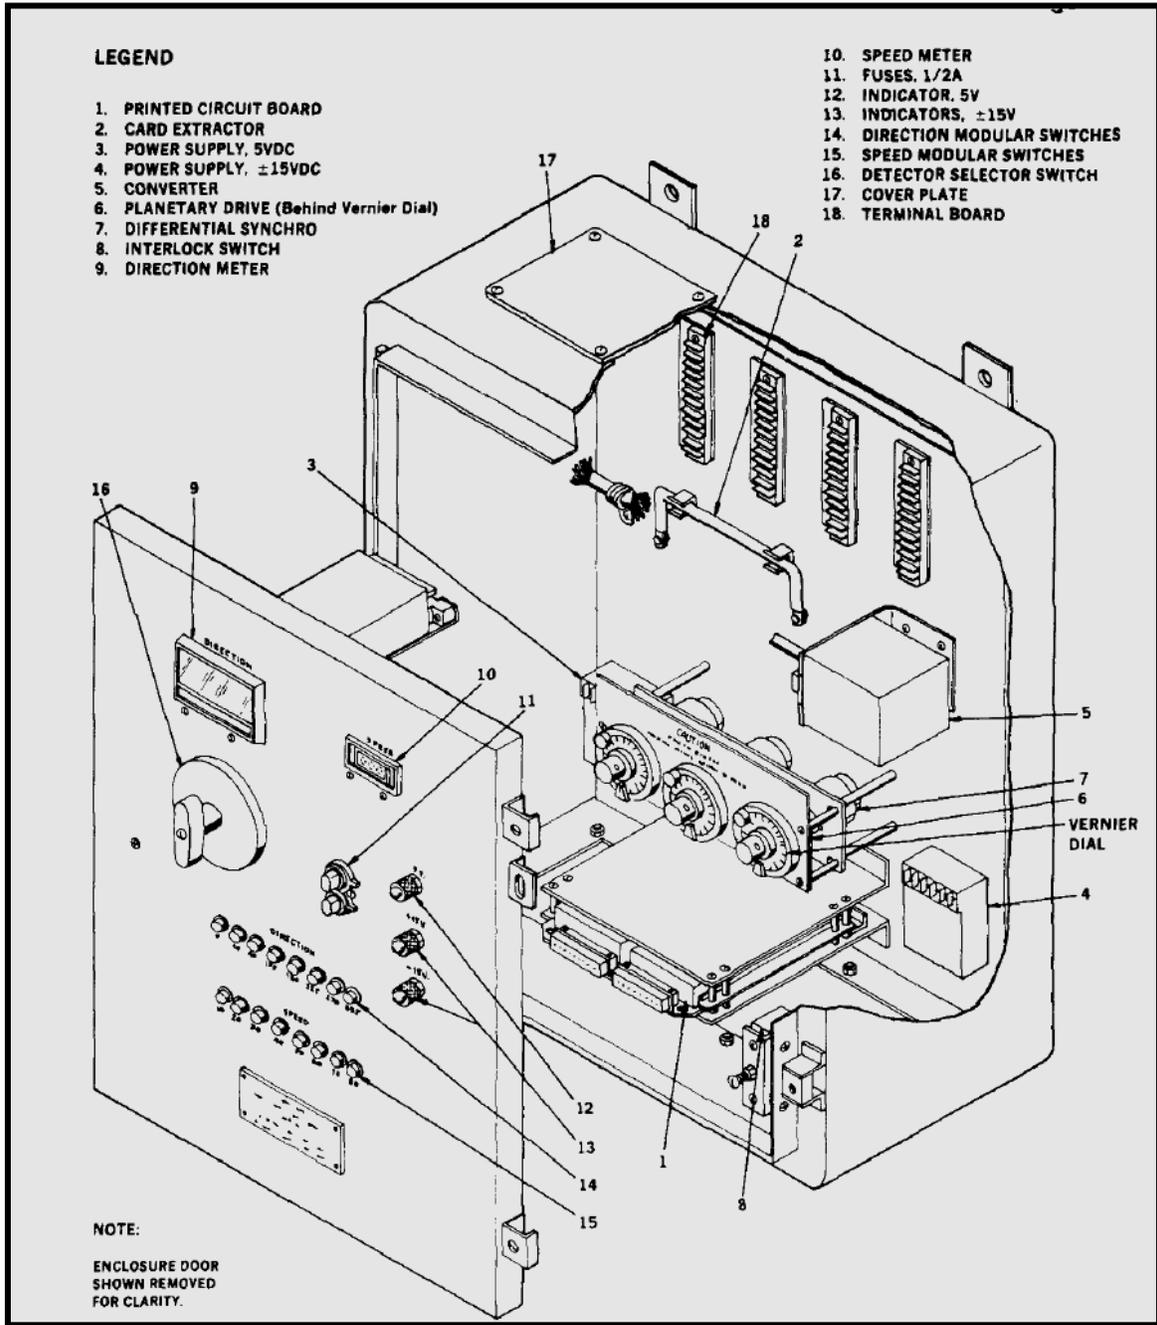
Single Station BITE Test and Synchro Panel Assembly.
